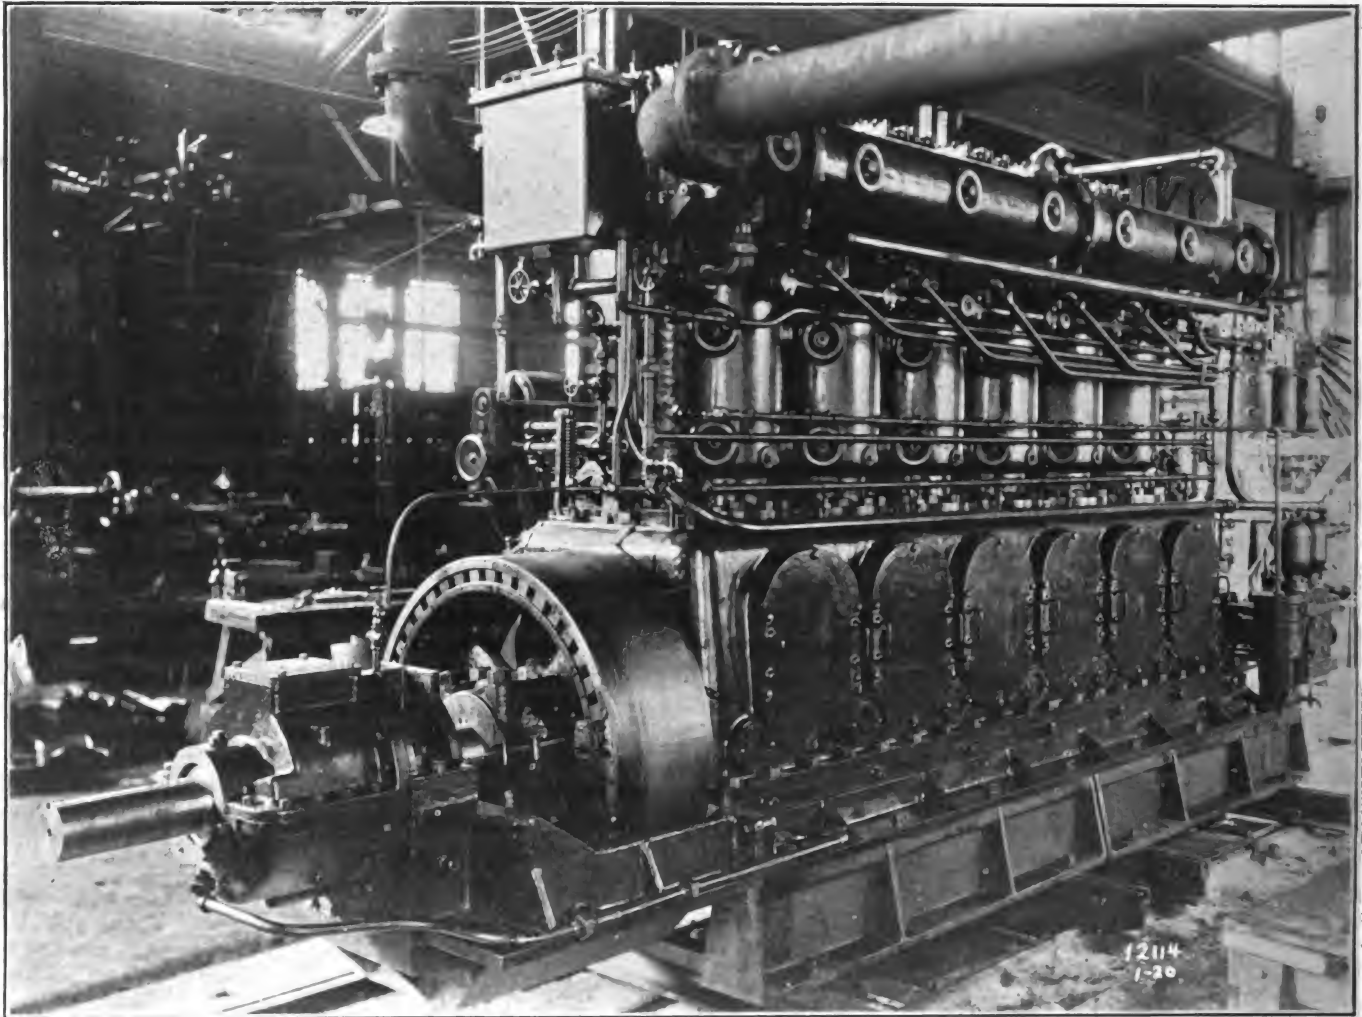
Right side view of P-R oil engine showing flywheel, Kingsbury thrust bearing, exhaust manifold and other details
